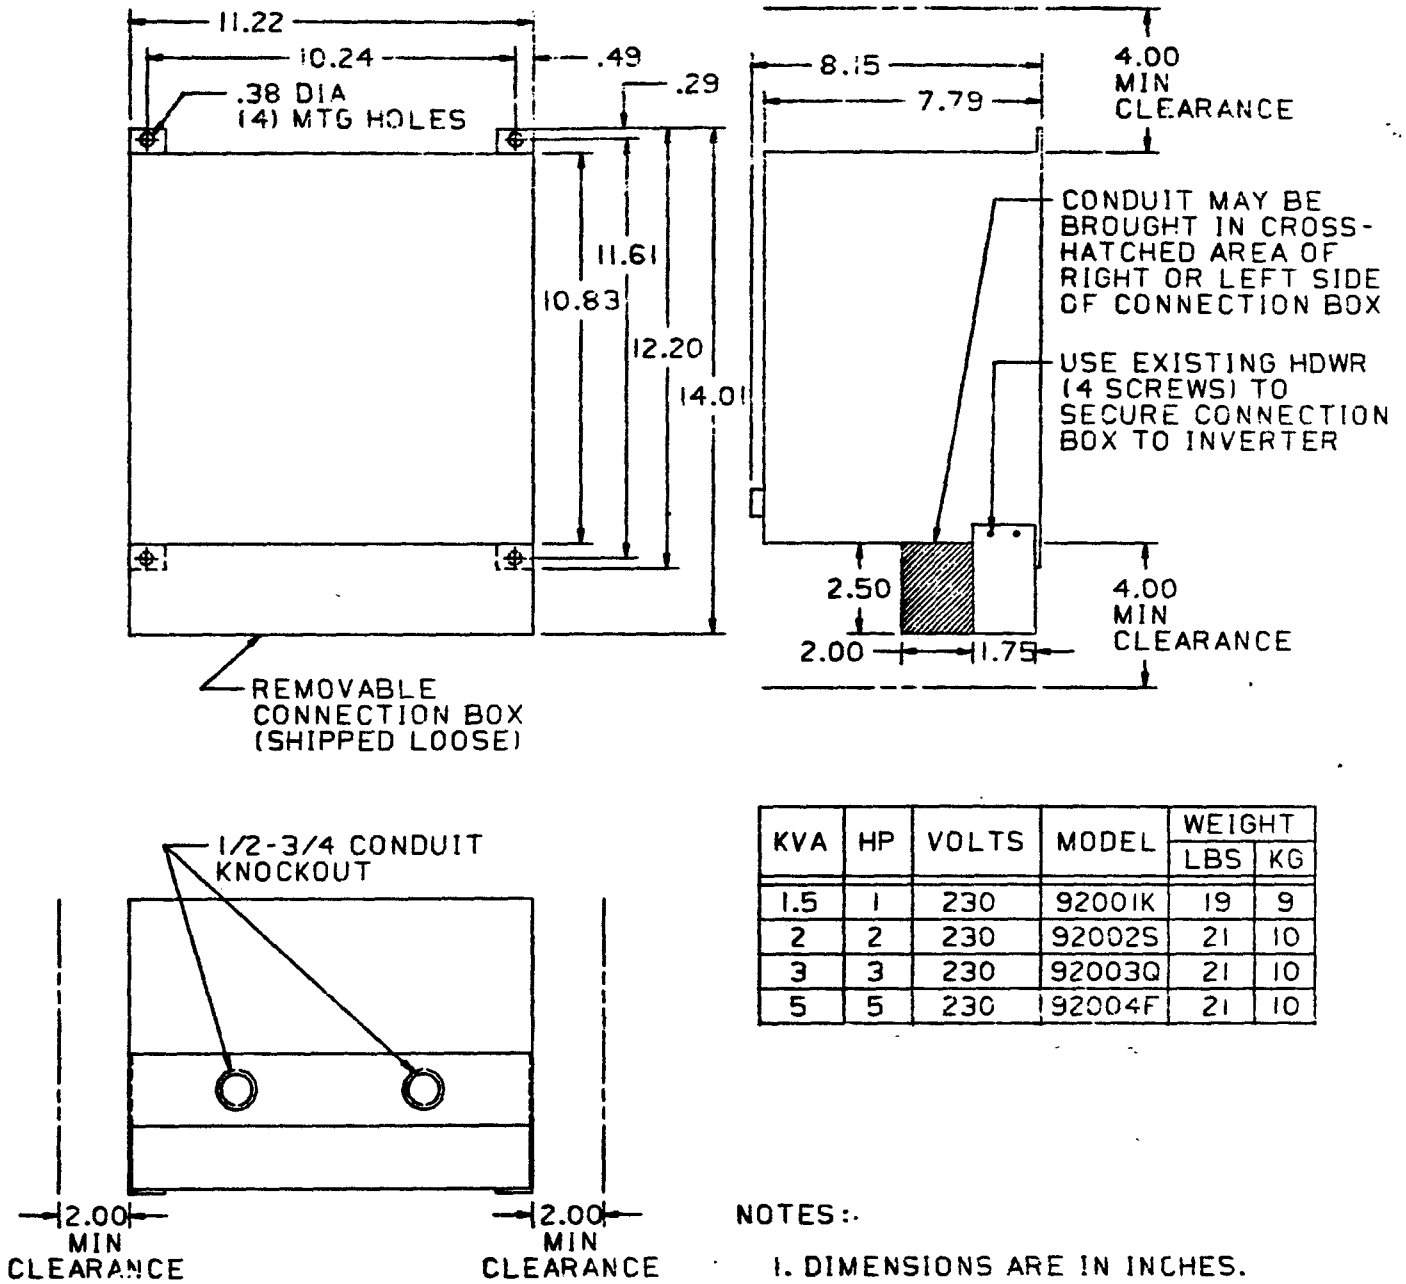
EXTERNAL VIEW AND DIMENSIONS
